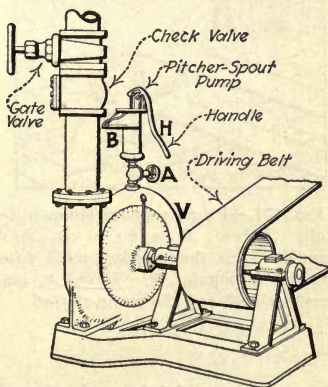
Priming-Pump Mounted On Casing Of Centrifugal Pump. (Valve A is first opened. Handle, H, is then worked until water appears at Spout B. Valve, A, may then be closed and the pump started.)
